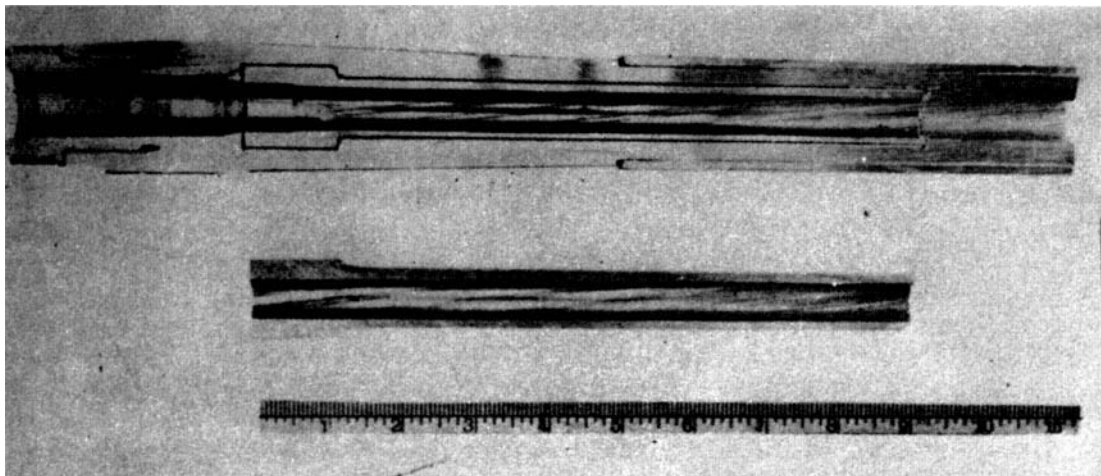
Cutaway view of caliber .50 machine gun barrel, showing stellite liner.
